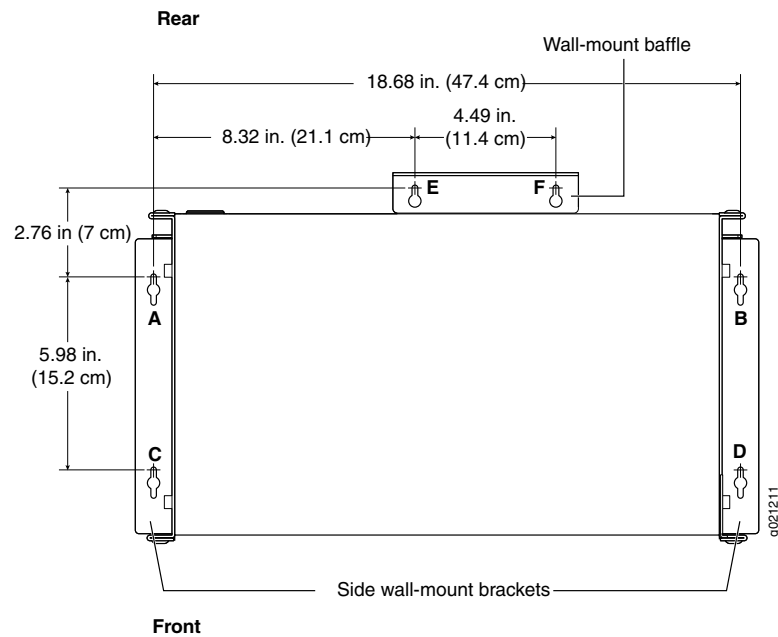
Attaching Wall-Mount Brackets to a Switch Chassis
